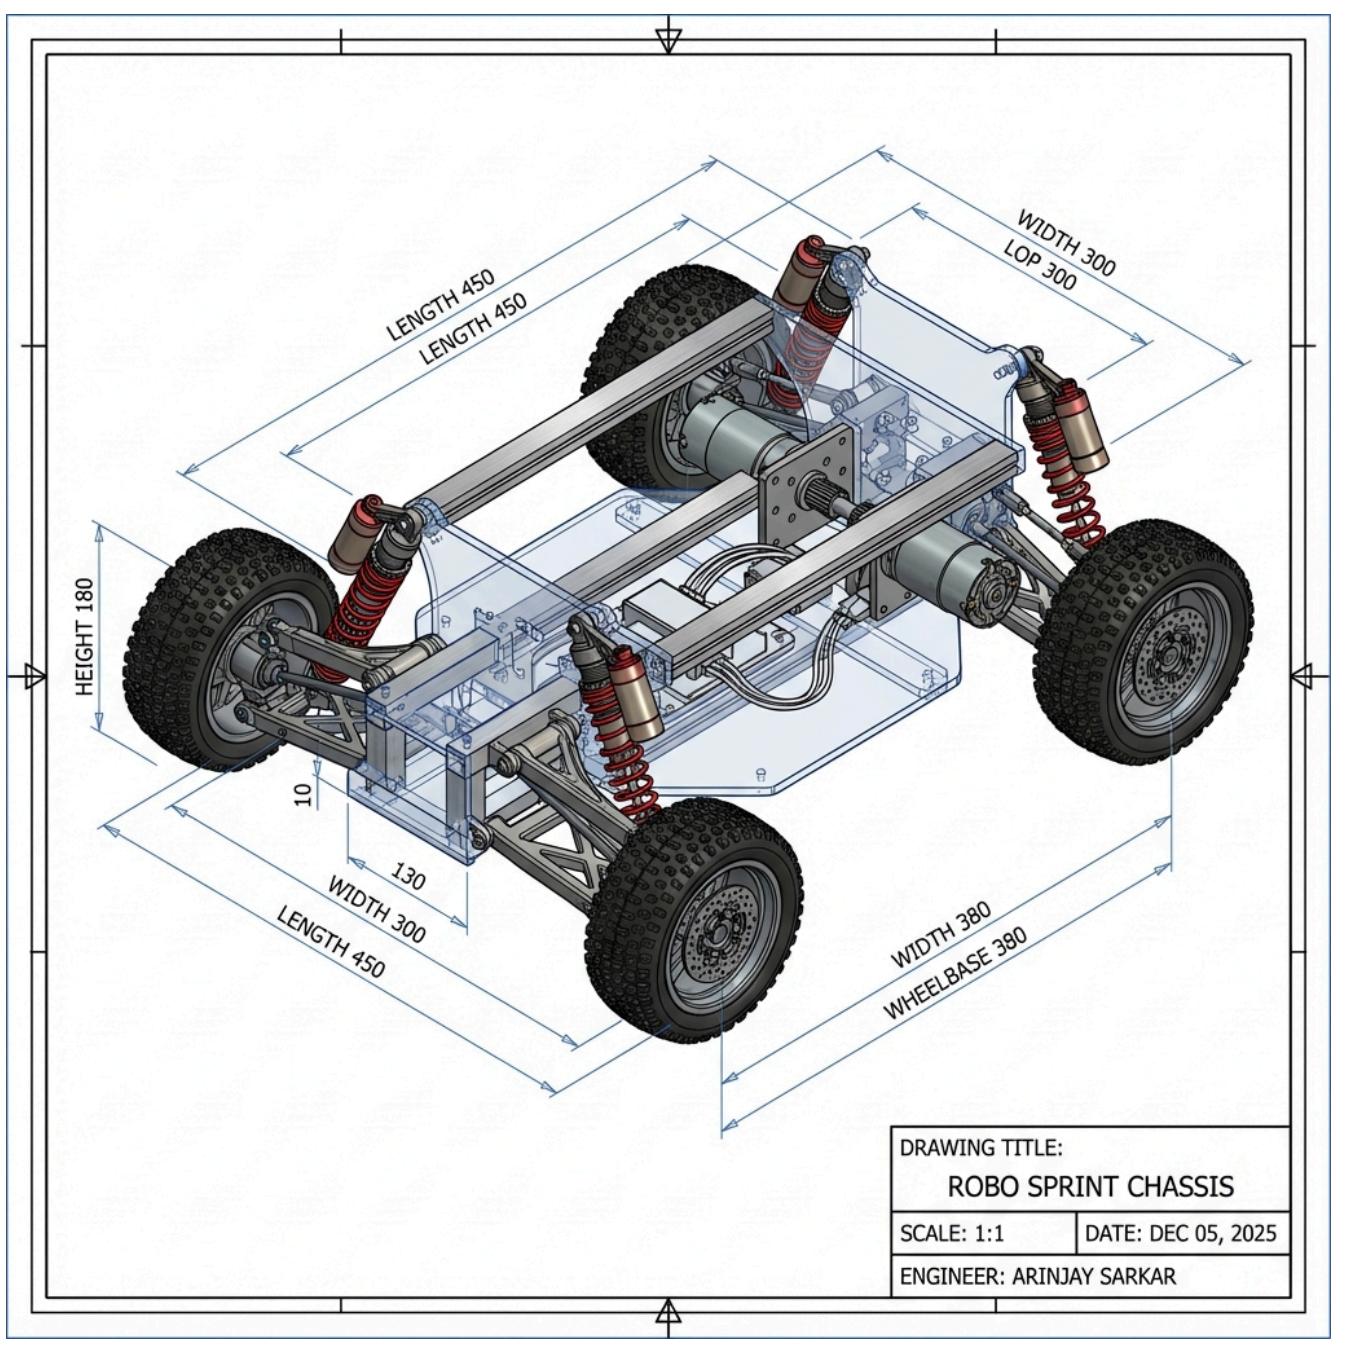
Chassis CAD Model — Isometric view with suspension and motor mounts
